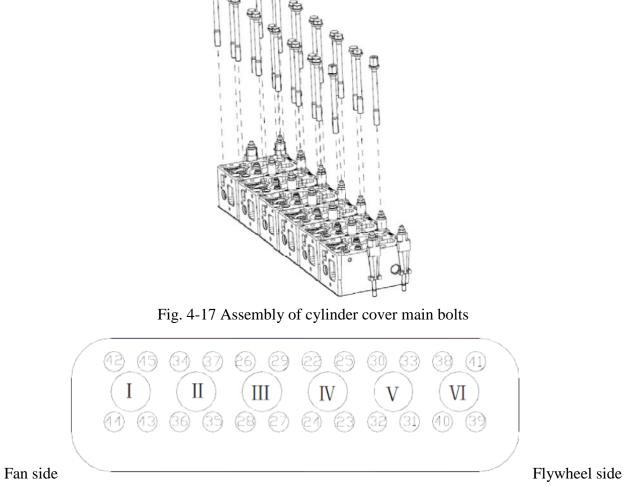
Tighten number 22~45 cylinder cover main bolts
